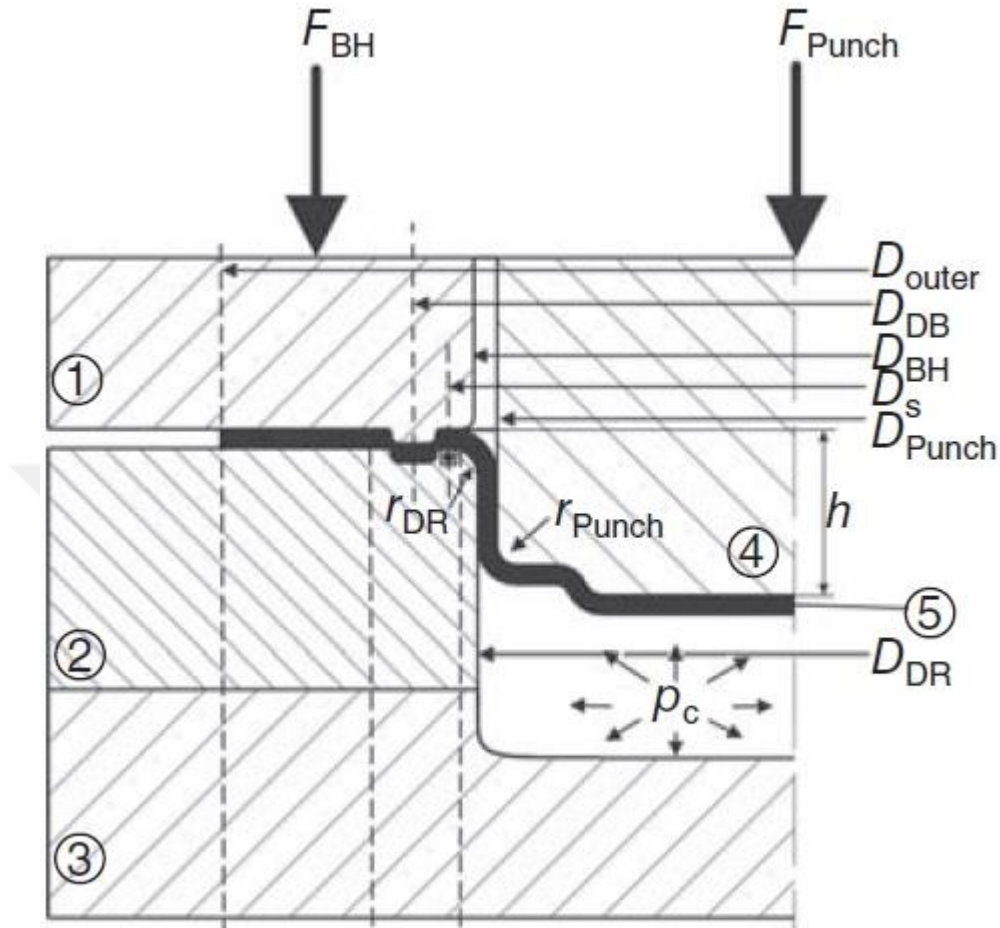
Showing a deformation area with main dimensions, forces and parts (1) blank holder (2) drawing ring (3) die (4) punch (5) blank [21].
